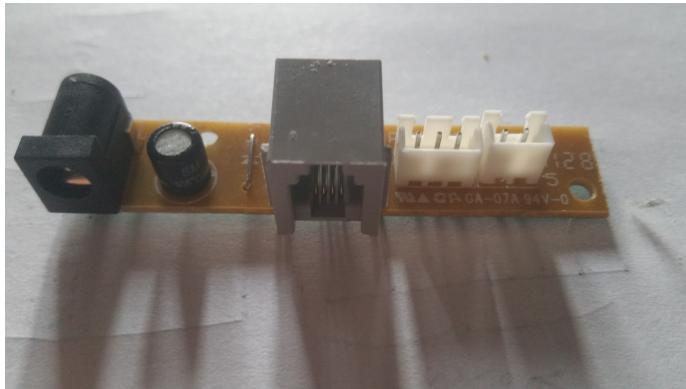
The secondary printed circuit board. This board connects the sensor to the primary circuit board.
